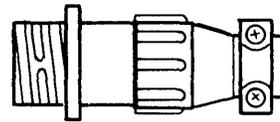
DMP11 Cable Drawings (Sheet 1 of 3)
